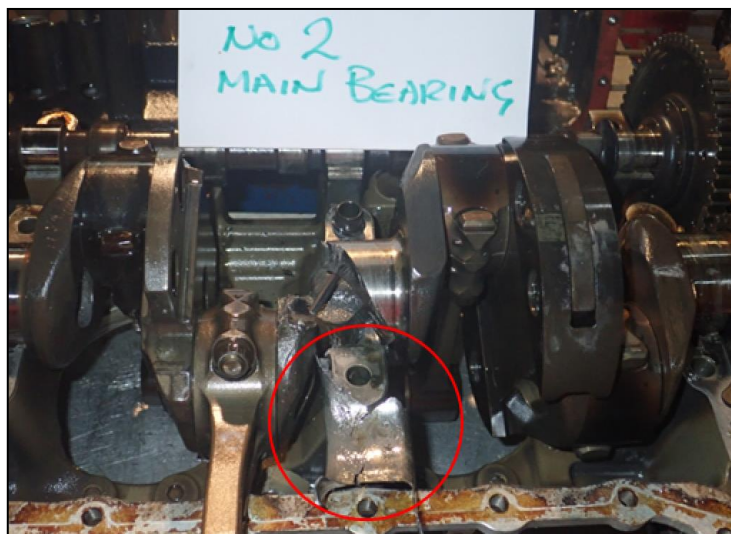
No. 2 main bearing shell damage (L/H crankcase)
